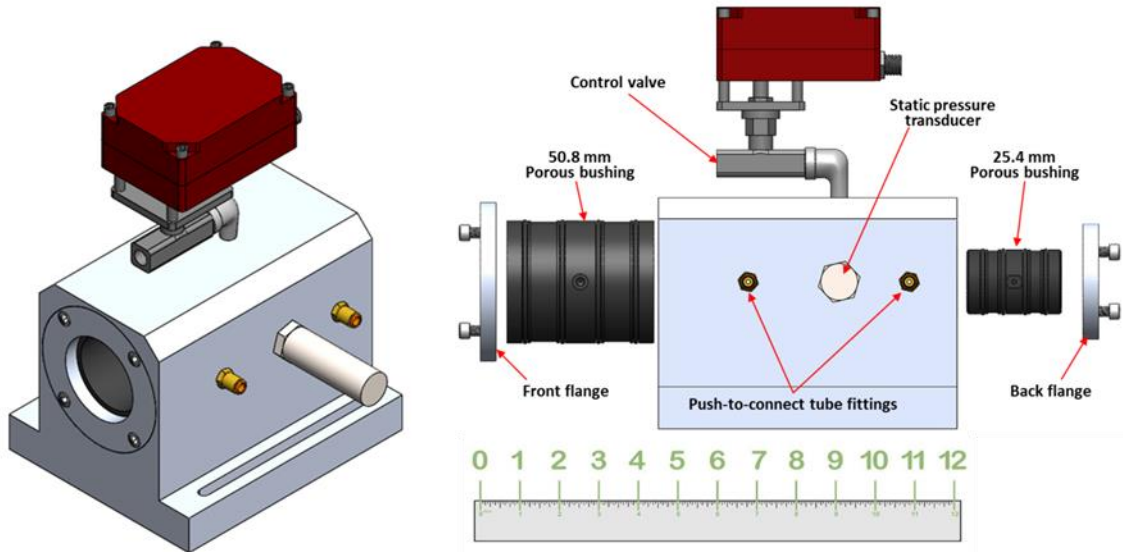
Schematic views of load shaft for thrust bearing test rig.
